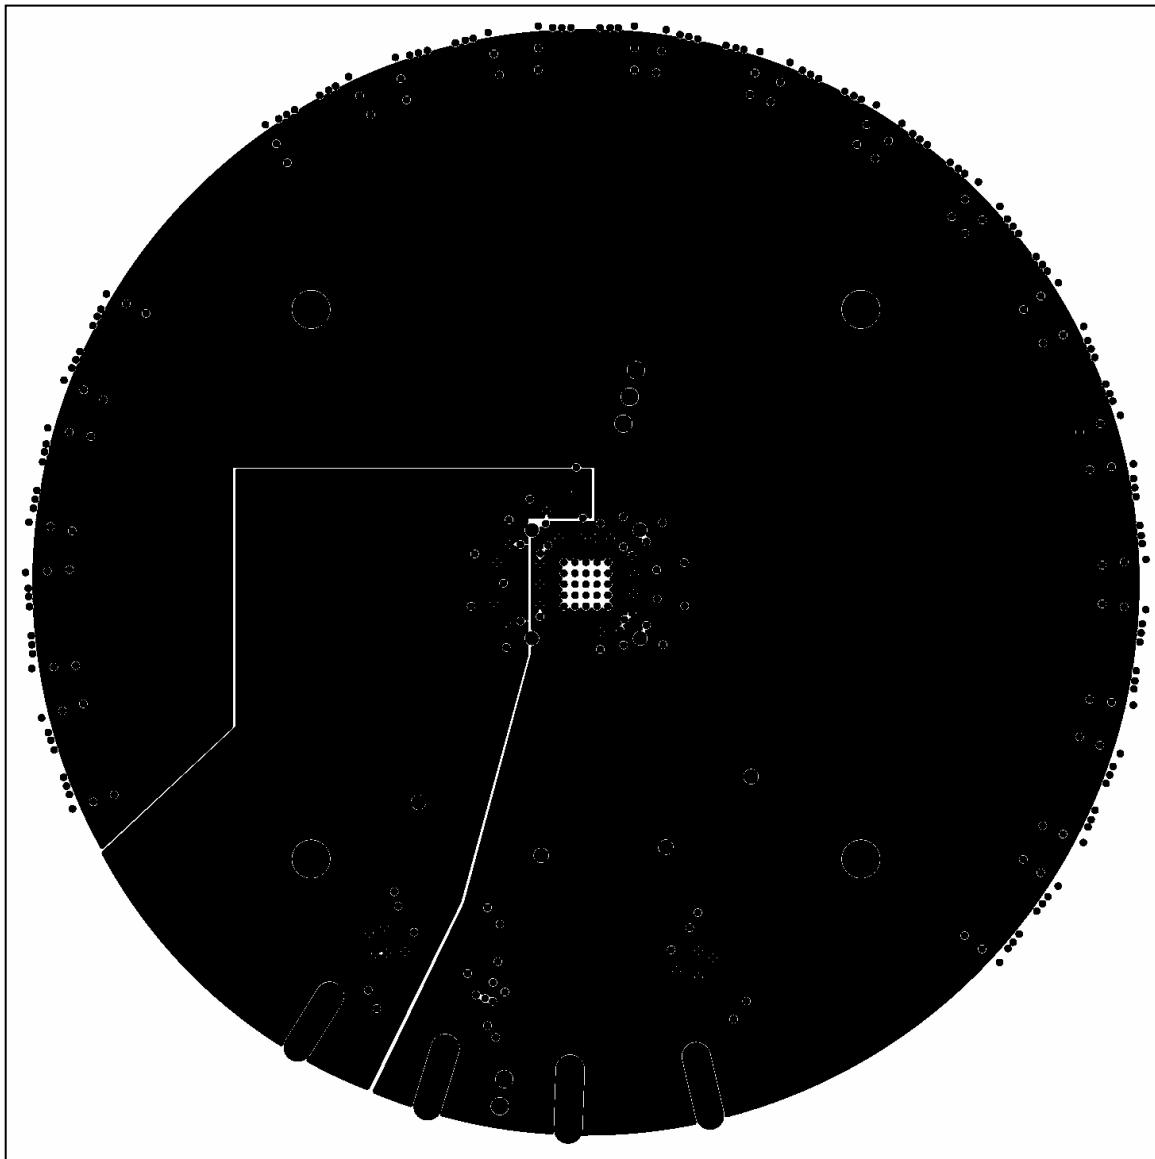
MAX3634 EV Kit PC Board Layout—Power Plane
